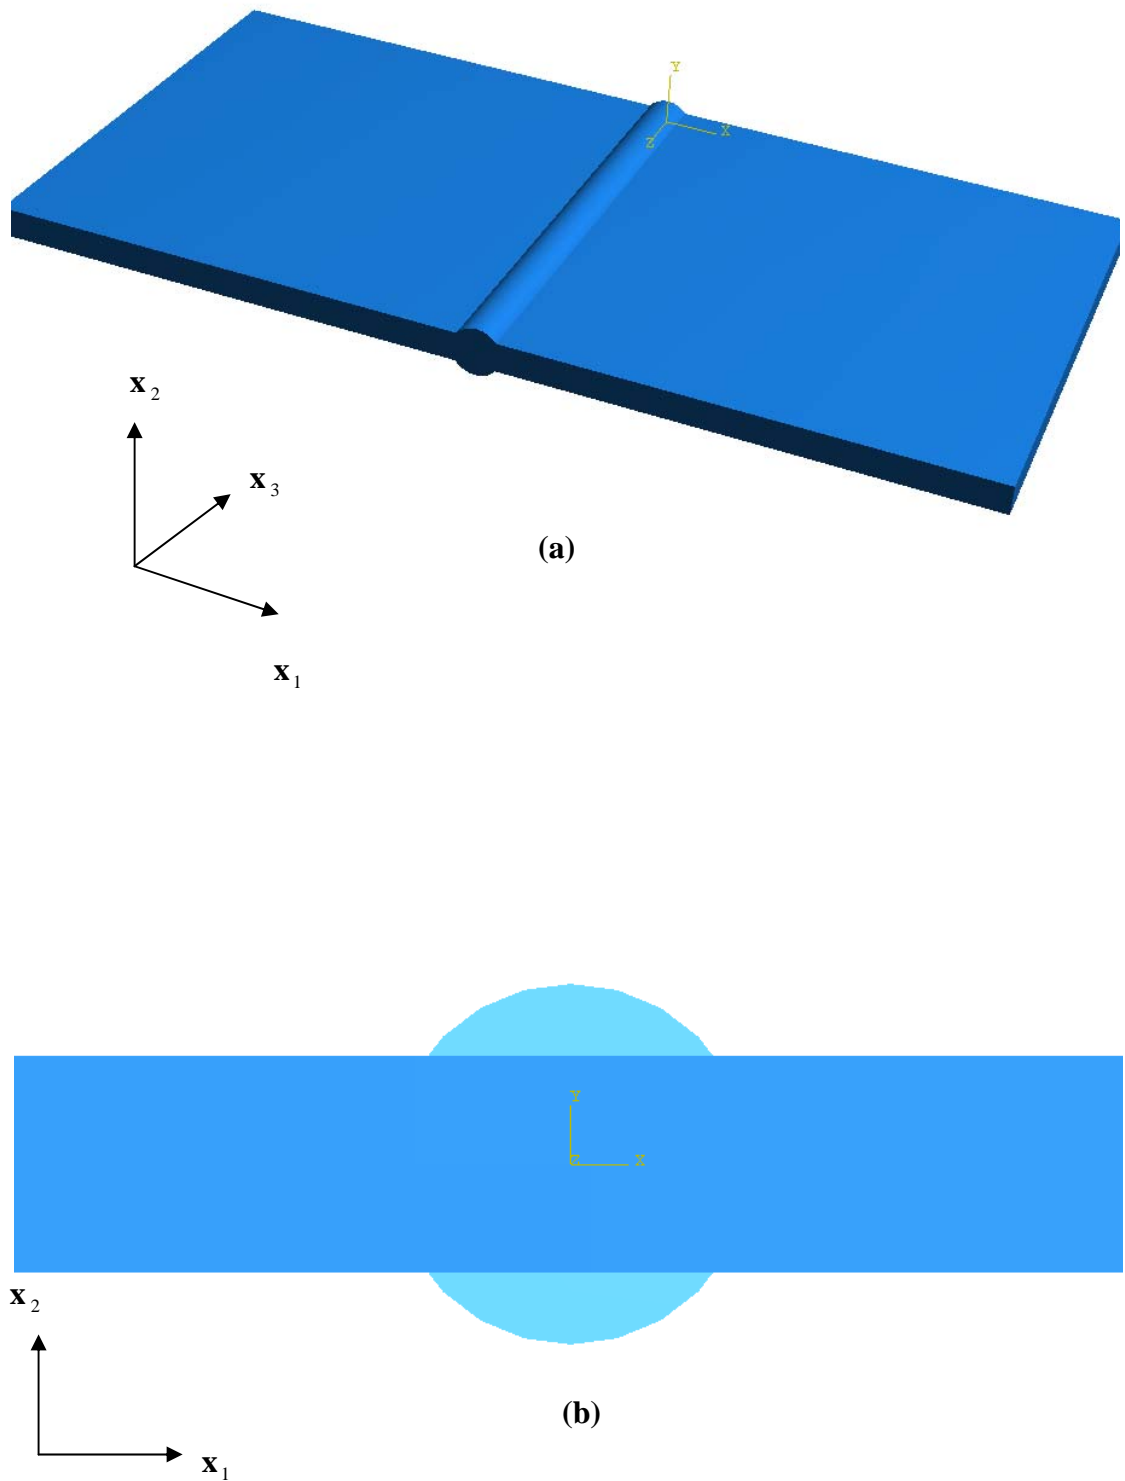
Real weld (a) 3D model, (b) 2D model
